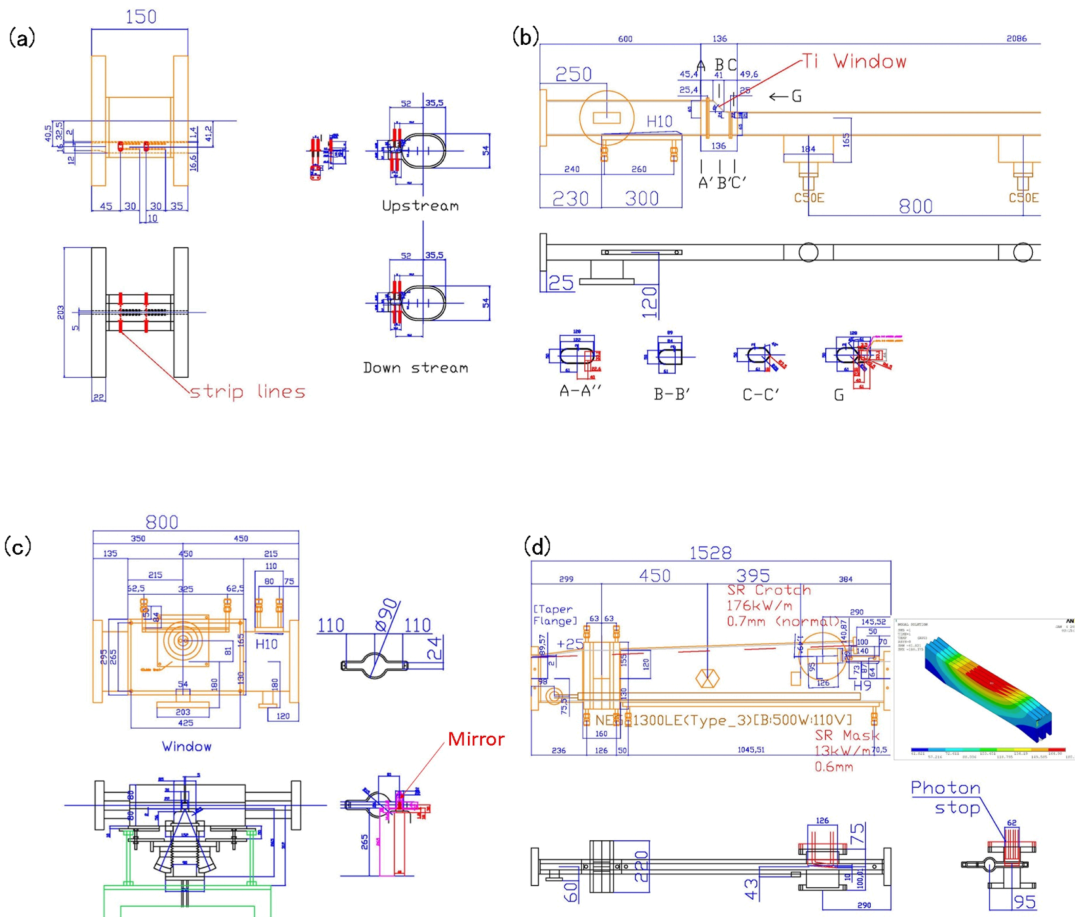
Design drawings of beam pipes for (a) beam injection, (b) beam abort, (c) SR beam size monitor and (d) branch chamber for X-ray beam size monitor.
